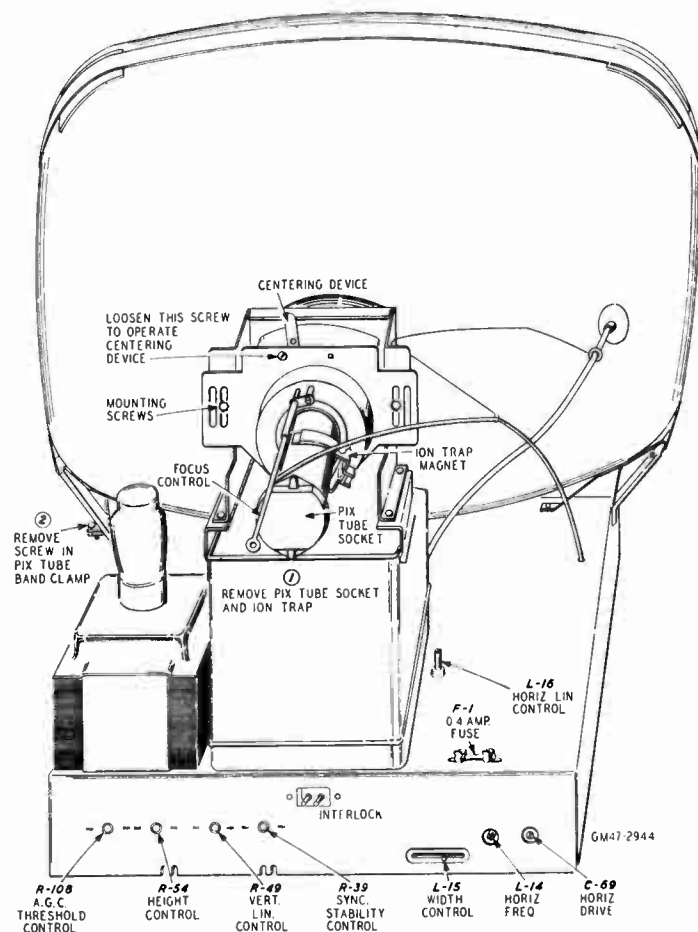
Removal of Picture Tube and Rear Chassis Controls
